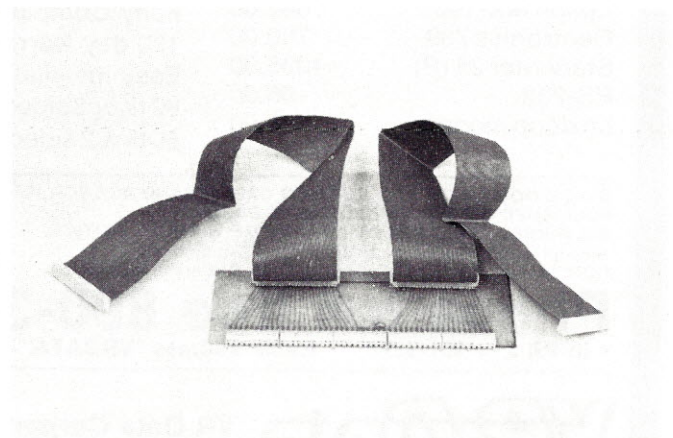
The extender card that fits onto the existing SWTP chassis. The two ribbon cables go to the QRC extension board. This is the back view of the board.
